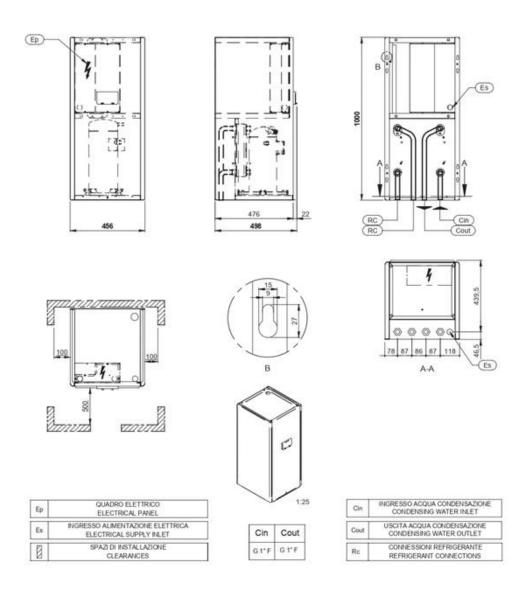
Dimensions and appearance of a heat pump for installation in a local engine room
